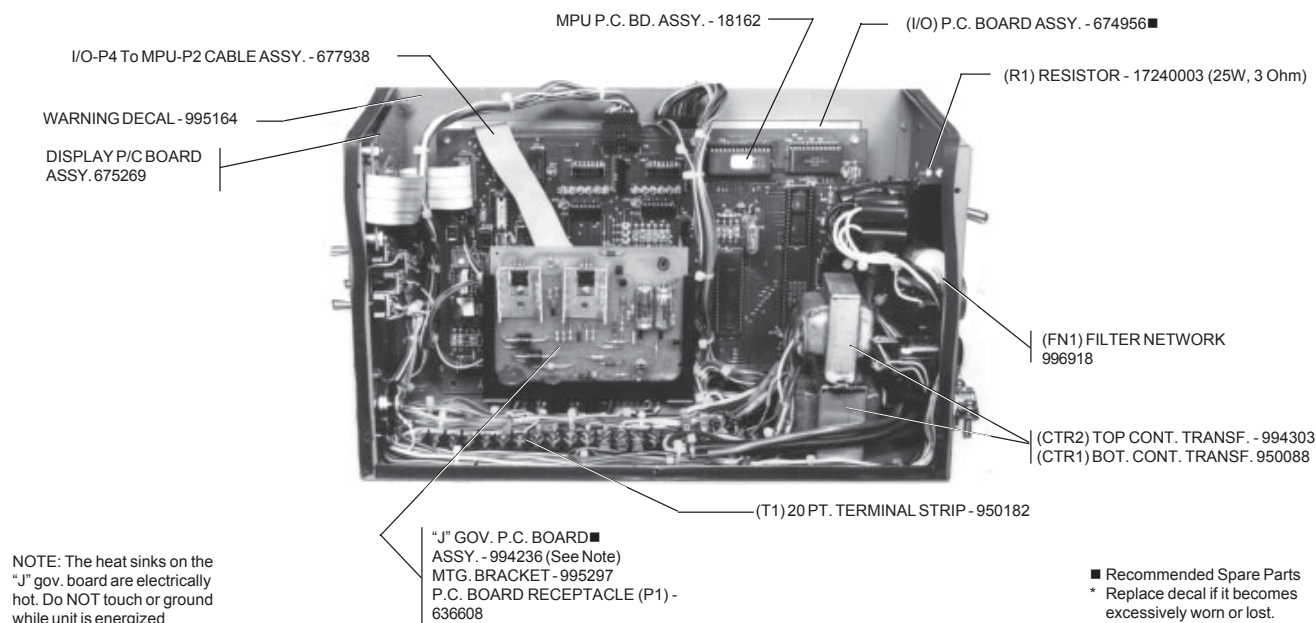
DIGIMIG Control Assembly, P/N 30786
